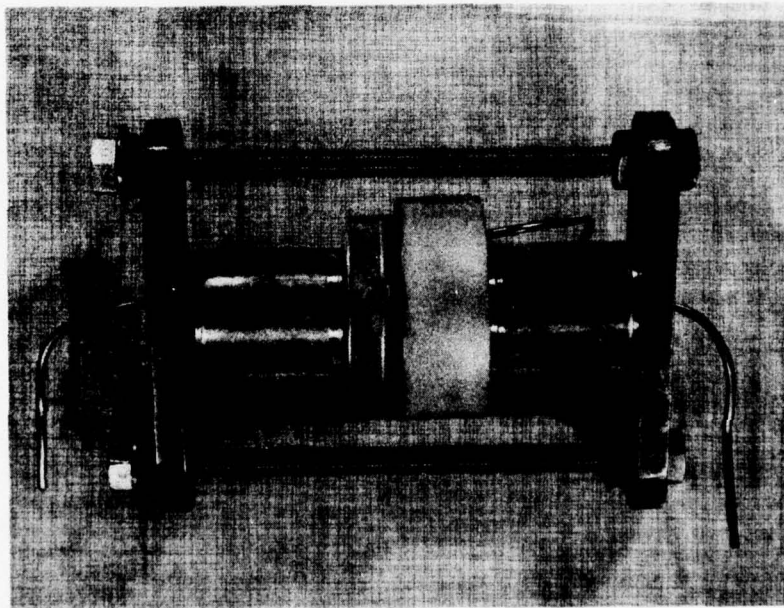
Fixture for Clamping the Transistor while it is Welded
